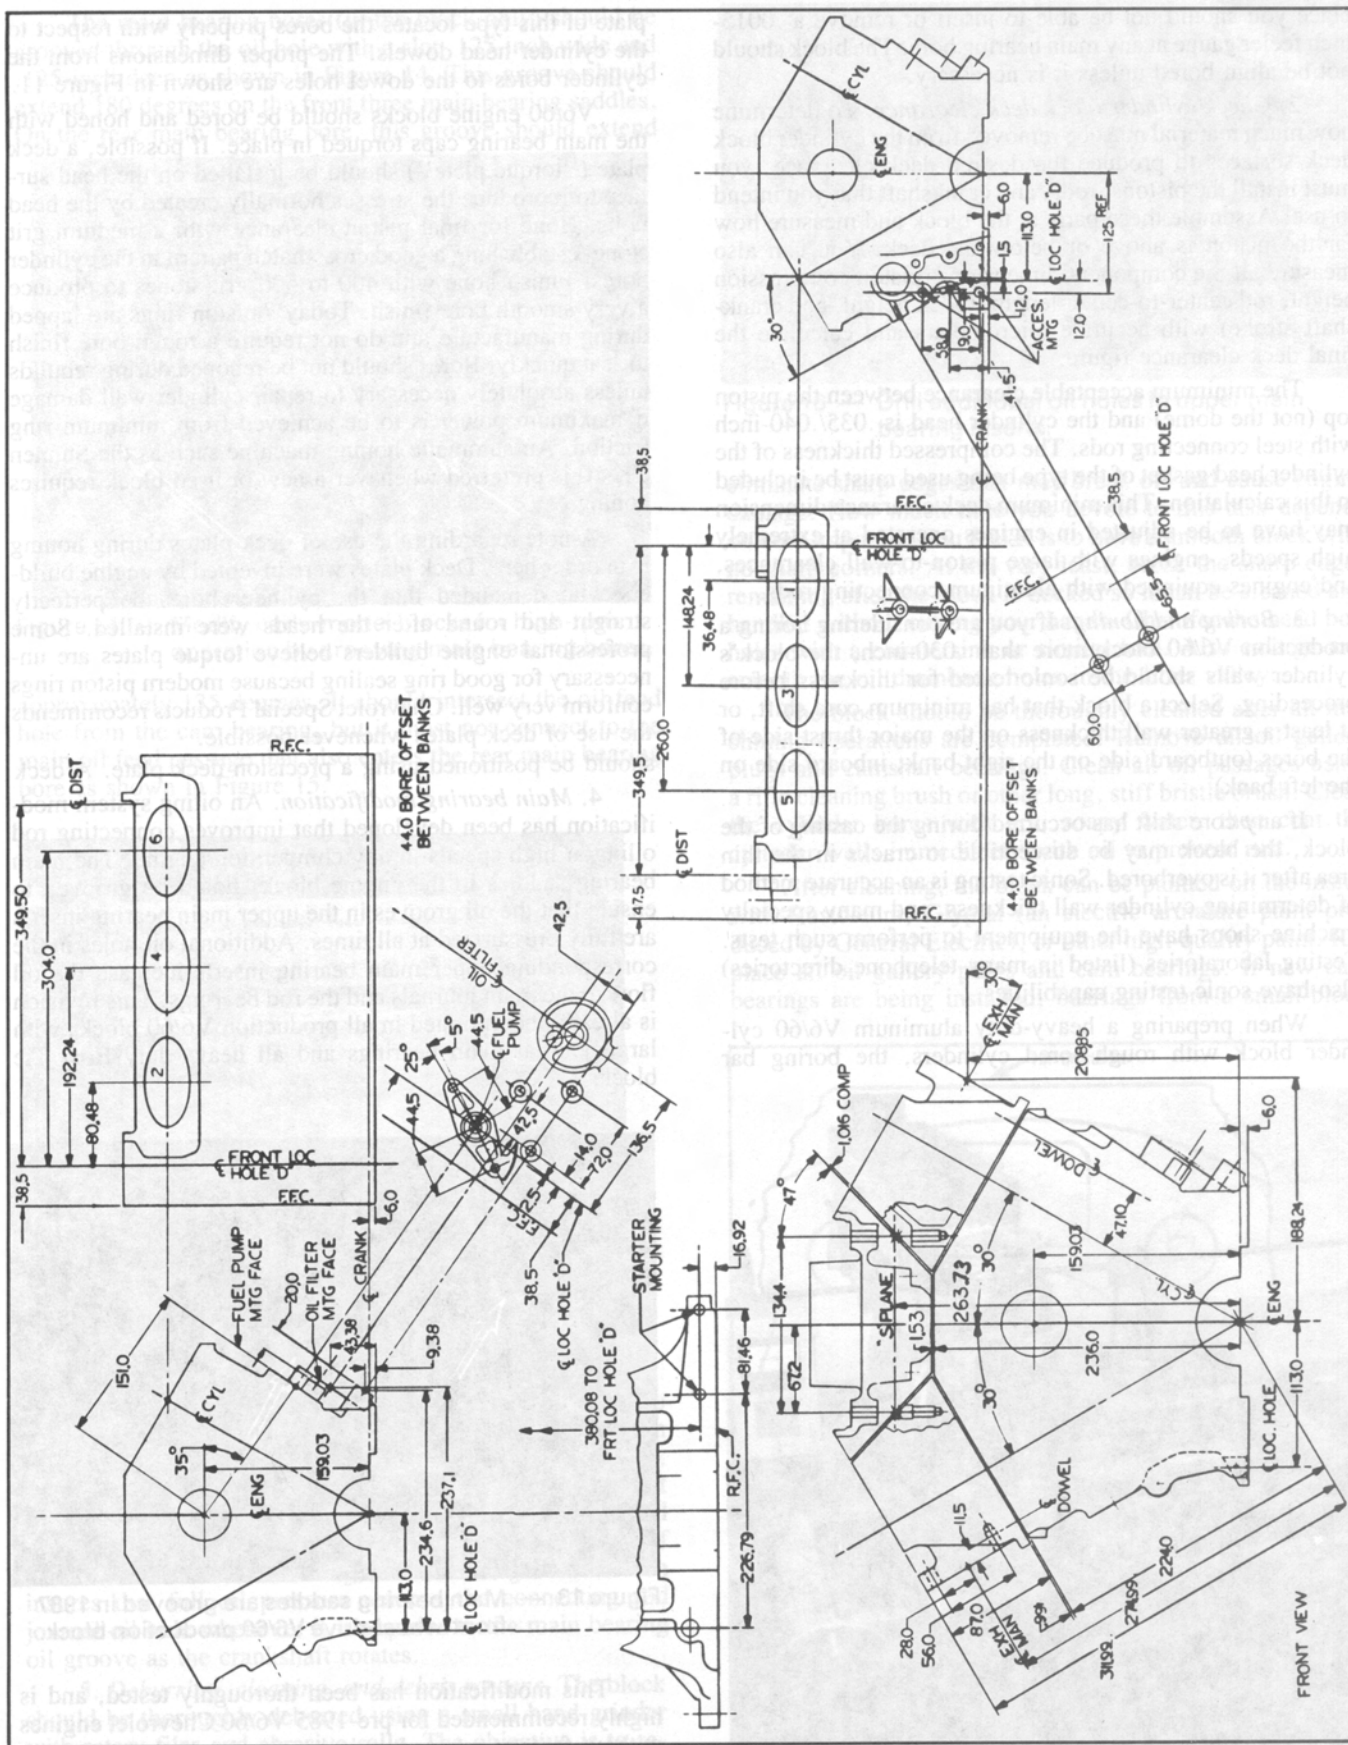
Chevrolet 60-degree V6 nominal dimensions.
